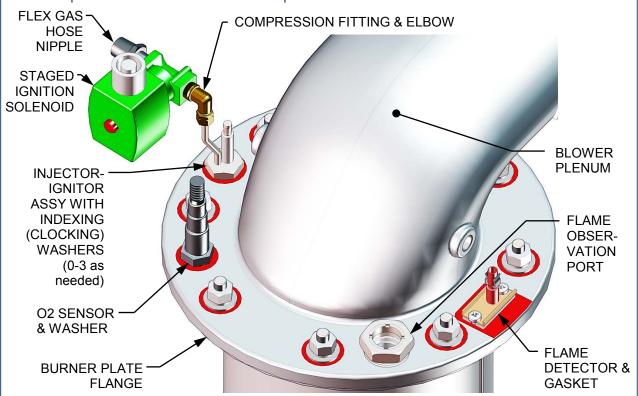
Igniter-Injector & Flame Detector Mounting Details
